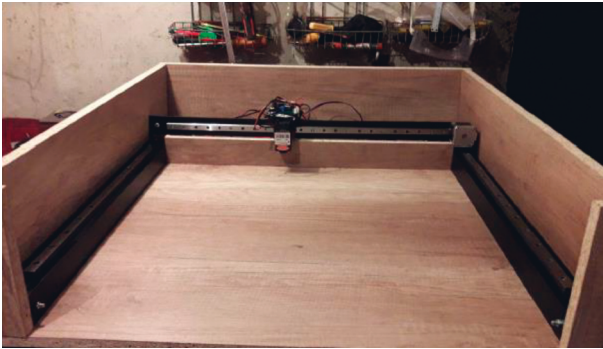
The assembled layout prototype of the Laser machine with CNC.
